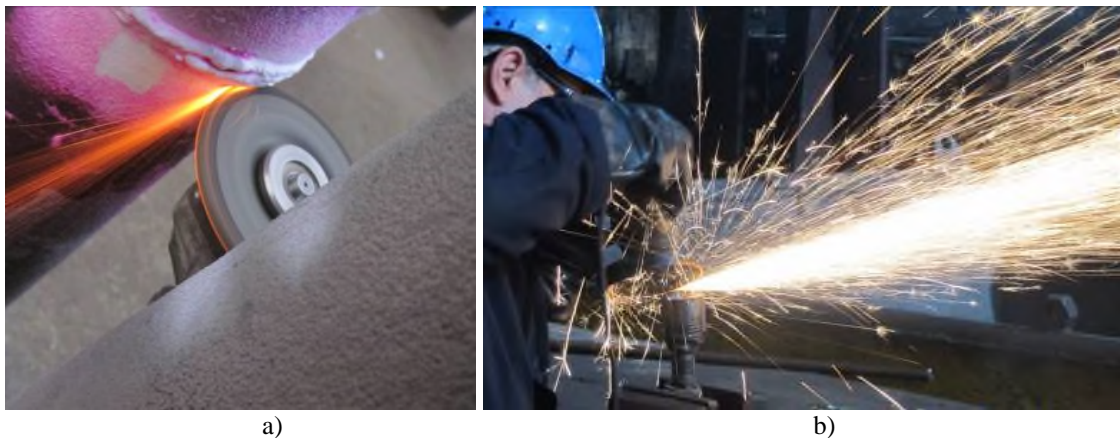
a) Burner pipe spark testing (base material X12NiCrSi35-16); b) Spark testing of 42CrMo4 steel
